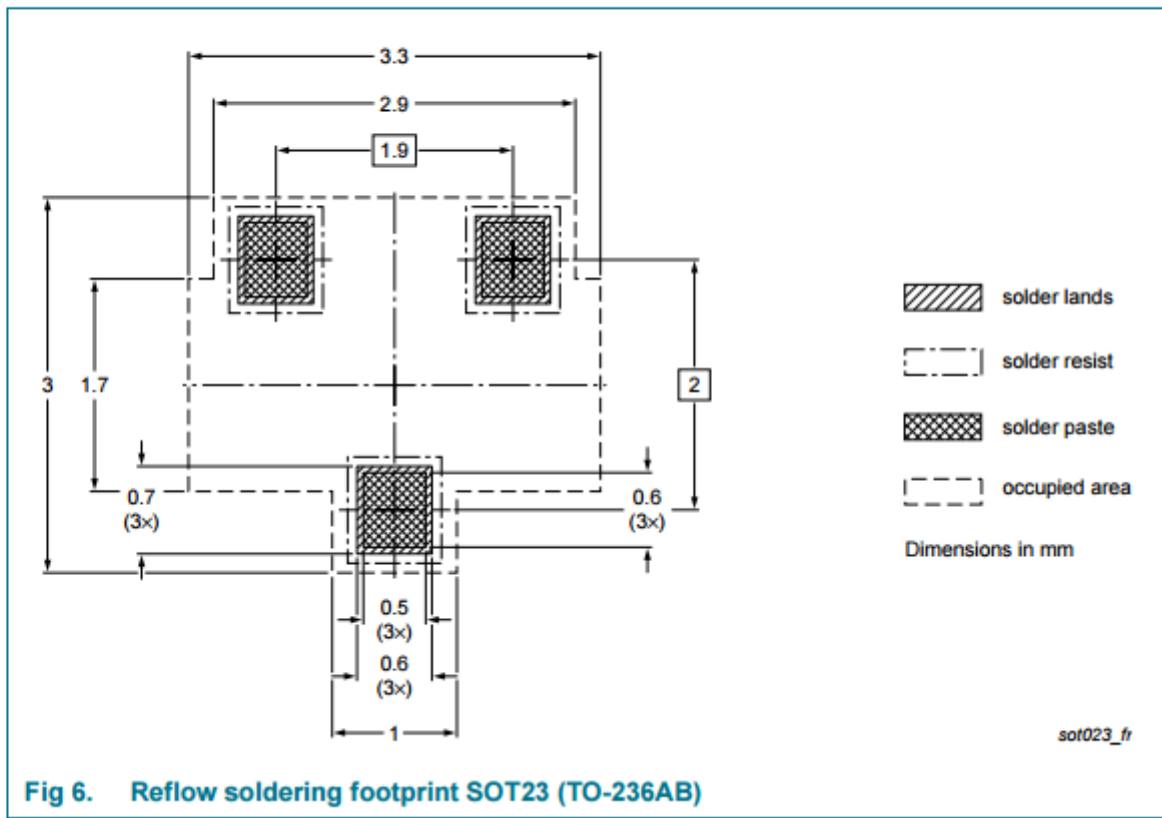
Reflow soldering footprint SOT23 (TO-236AB)
